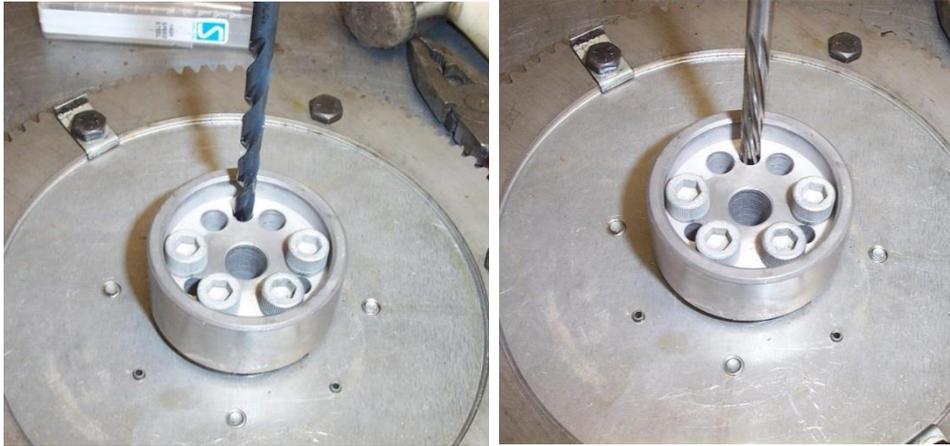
Drilling & Reaming Flywheel – ILLUSTRATION ONLY.
